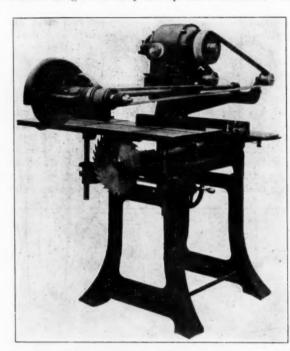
Handy Type of Universal Woodworker for Lamp-Socket Operation or for Small-Powered Motors
